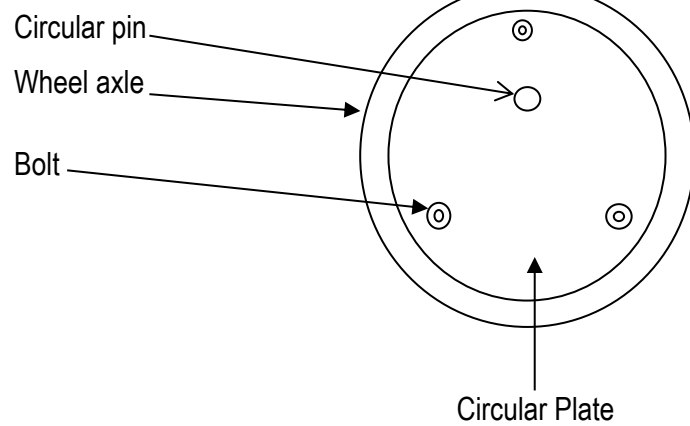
Connection of DE transducer to wheel axle after removal of journal box cover.
